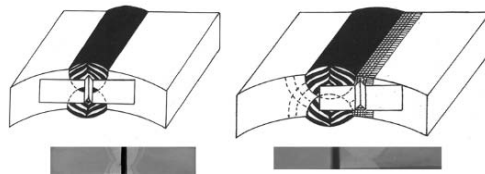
Details of extraction of Charpy V-notch specimens from welded joint
